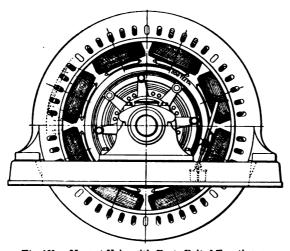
Magnet-Yoke with Parts Bolted Together on Inside of Ring.
